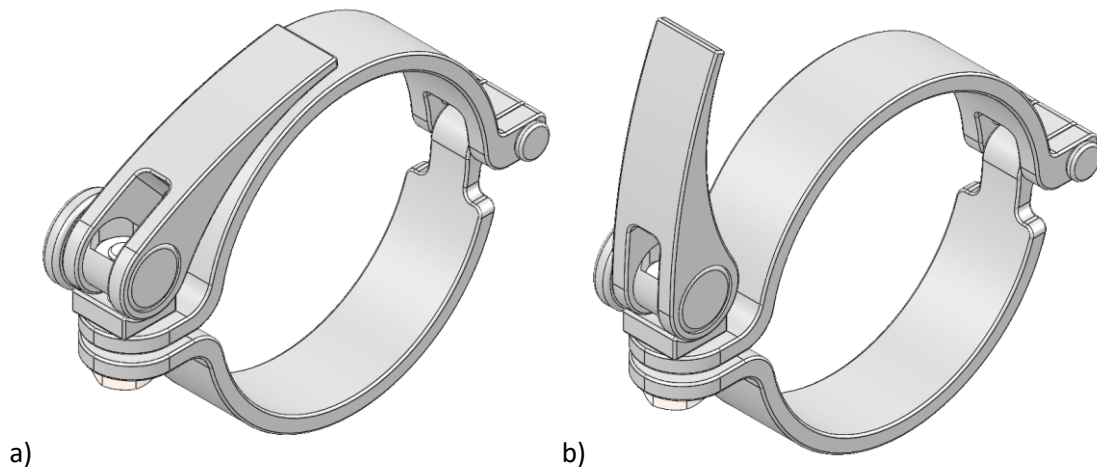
Assembly of the developed quick release mechanism: closed position (a), and open position (b)
